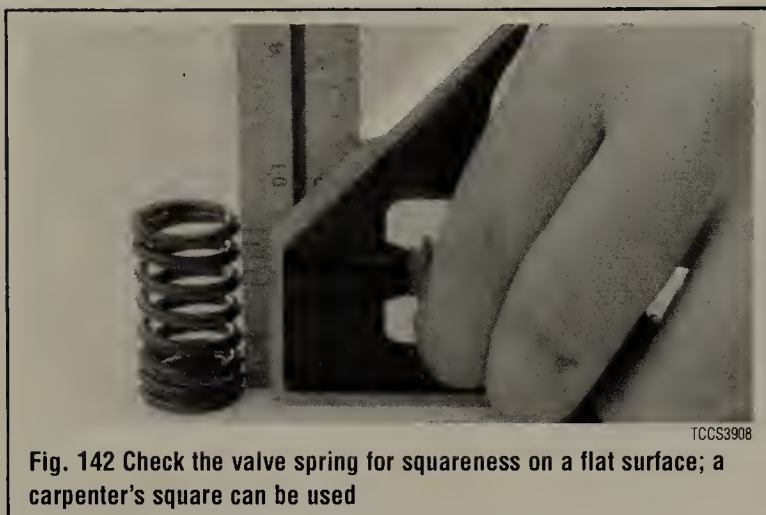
Check the valve spring for squareness on a flat surface; a carpenter's square can be used
